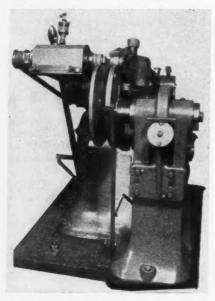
Cams are finished to size by grinding in this special cam grinding machine.
